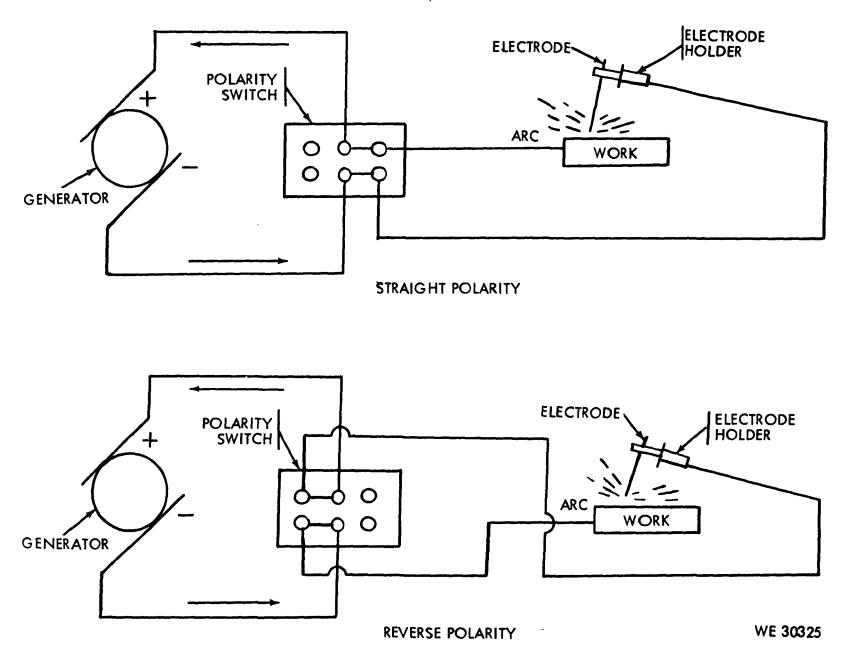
Straight and reverse polarity in electric welding.
